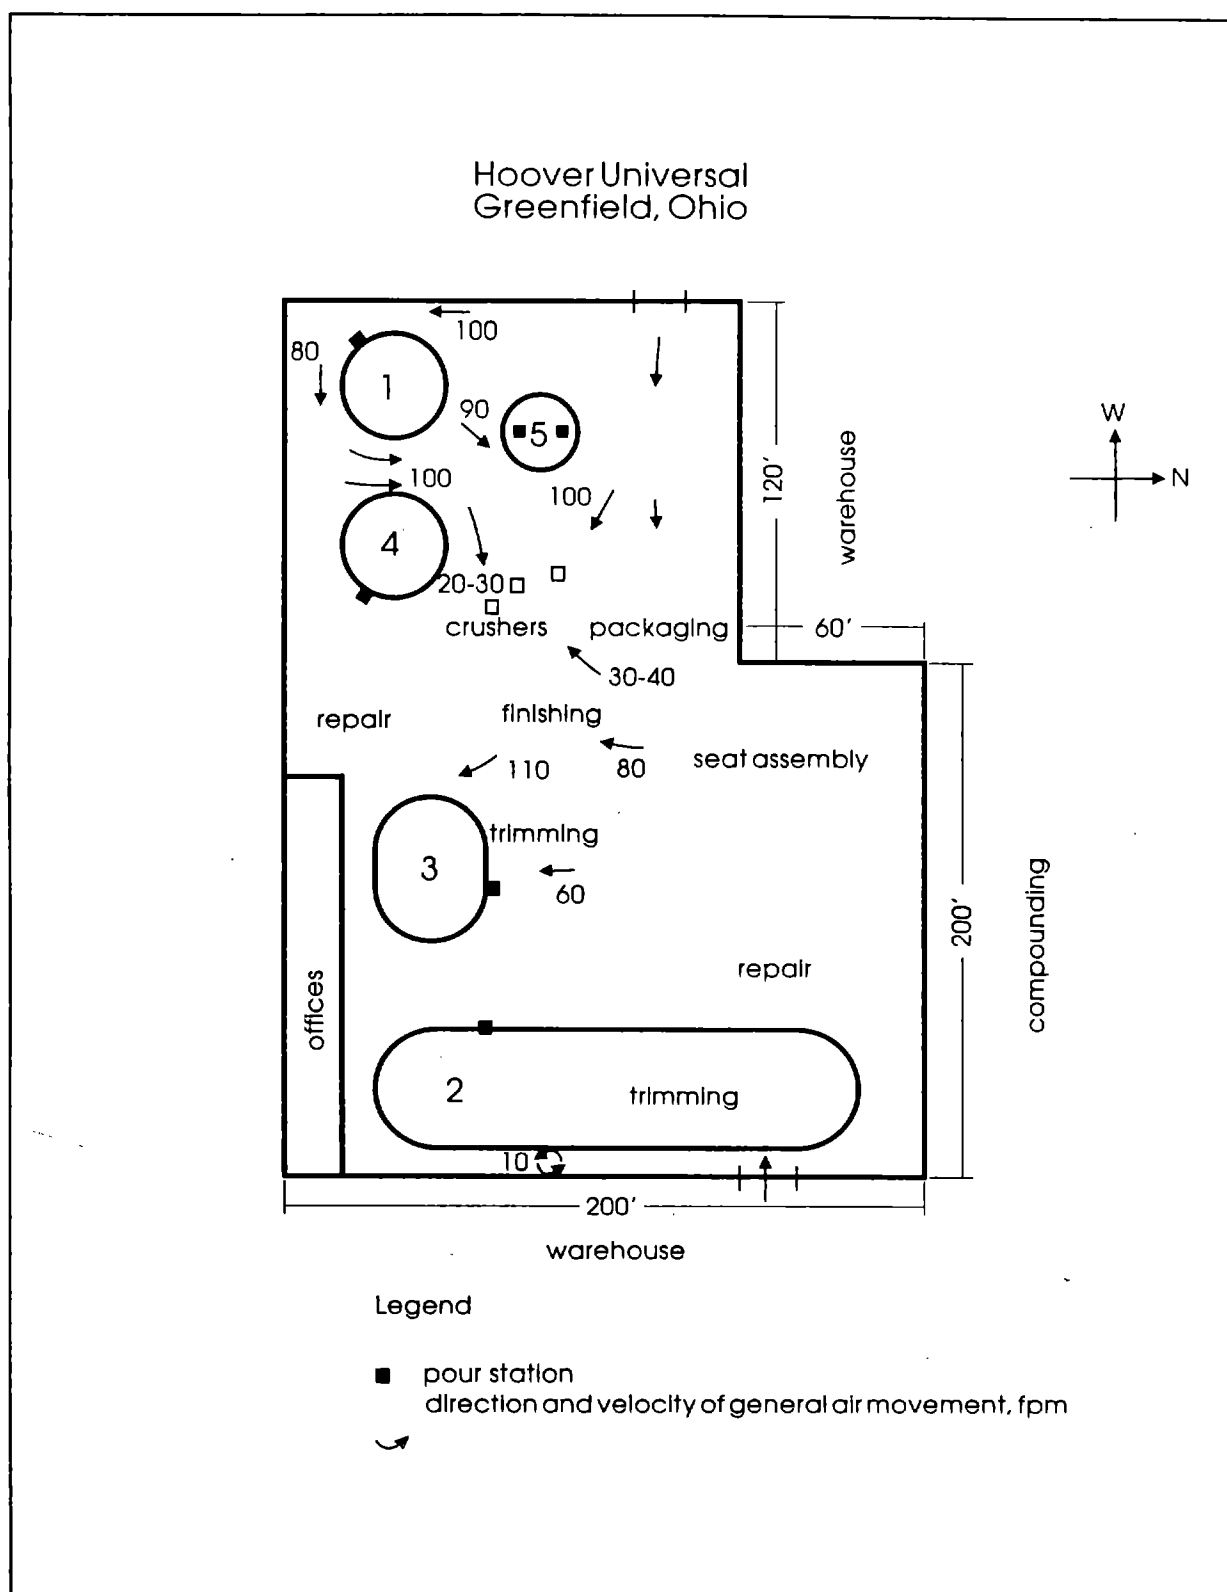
Floor plan of the Hoover Universal Plant. Adapted from Boeniger (1986).
